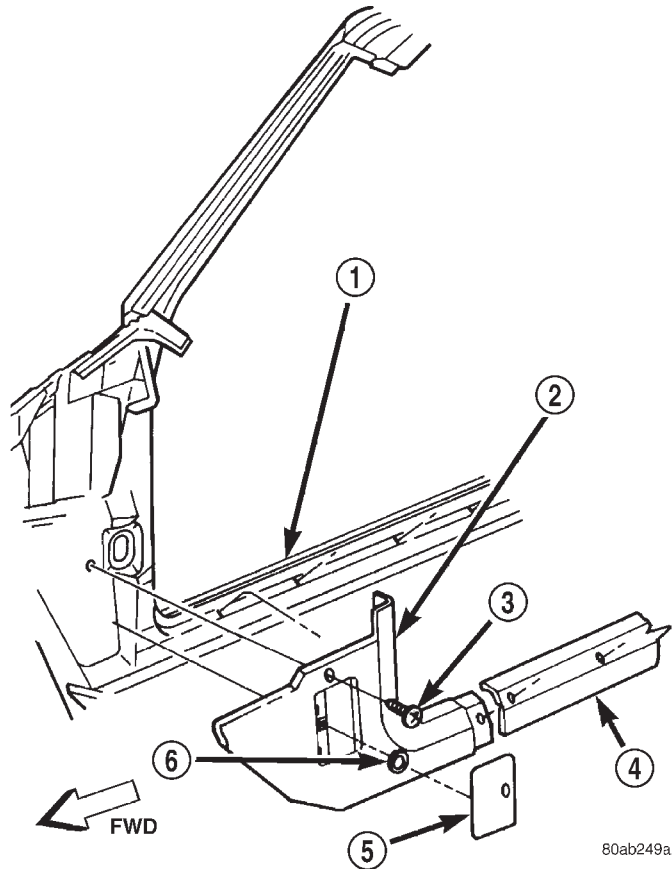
Right Cowl Side Inner Trim Remove/Install
